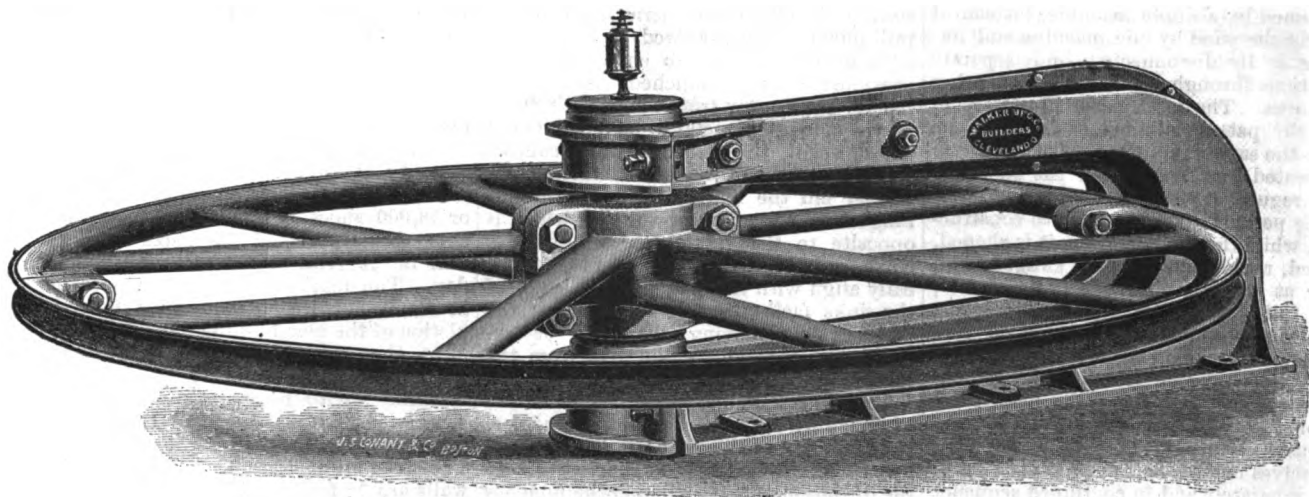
U-Frame and Sheave with Staggered Arms.
